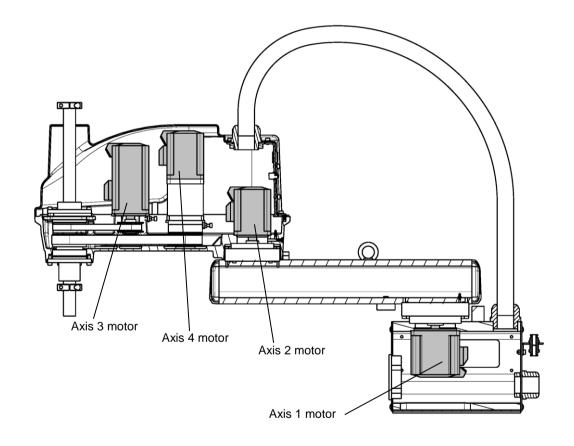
Motor locations (KHL-500, KHL-600, KHL-700)
